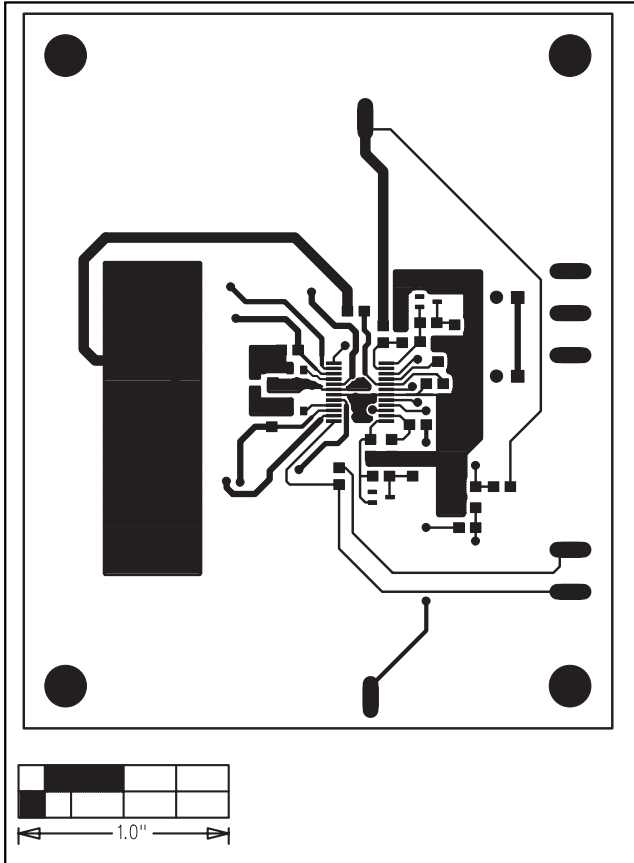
MAX1858 EV Kit PC Board Layout—Solder Side
